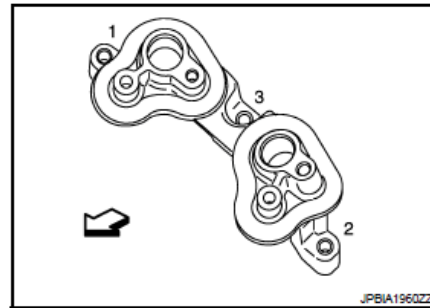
Identifying Camshaft Sensor Bracket Bolts
